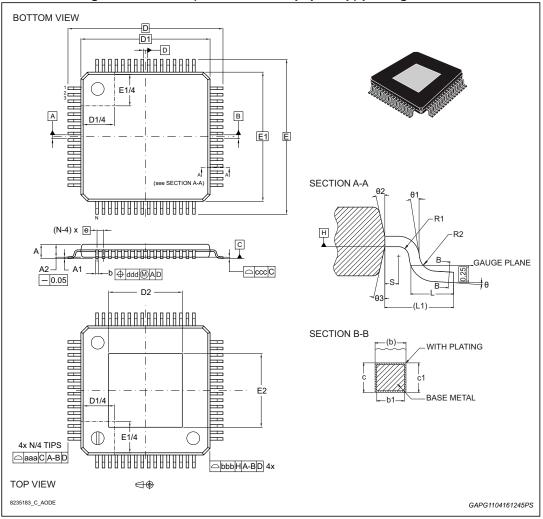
TQFP64 (10x10x1 mm exp. pad up) package outline
